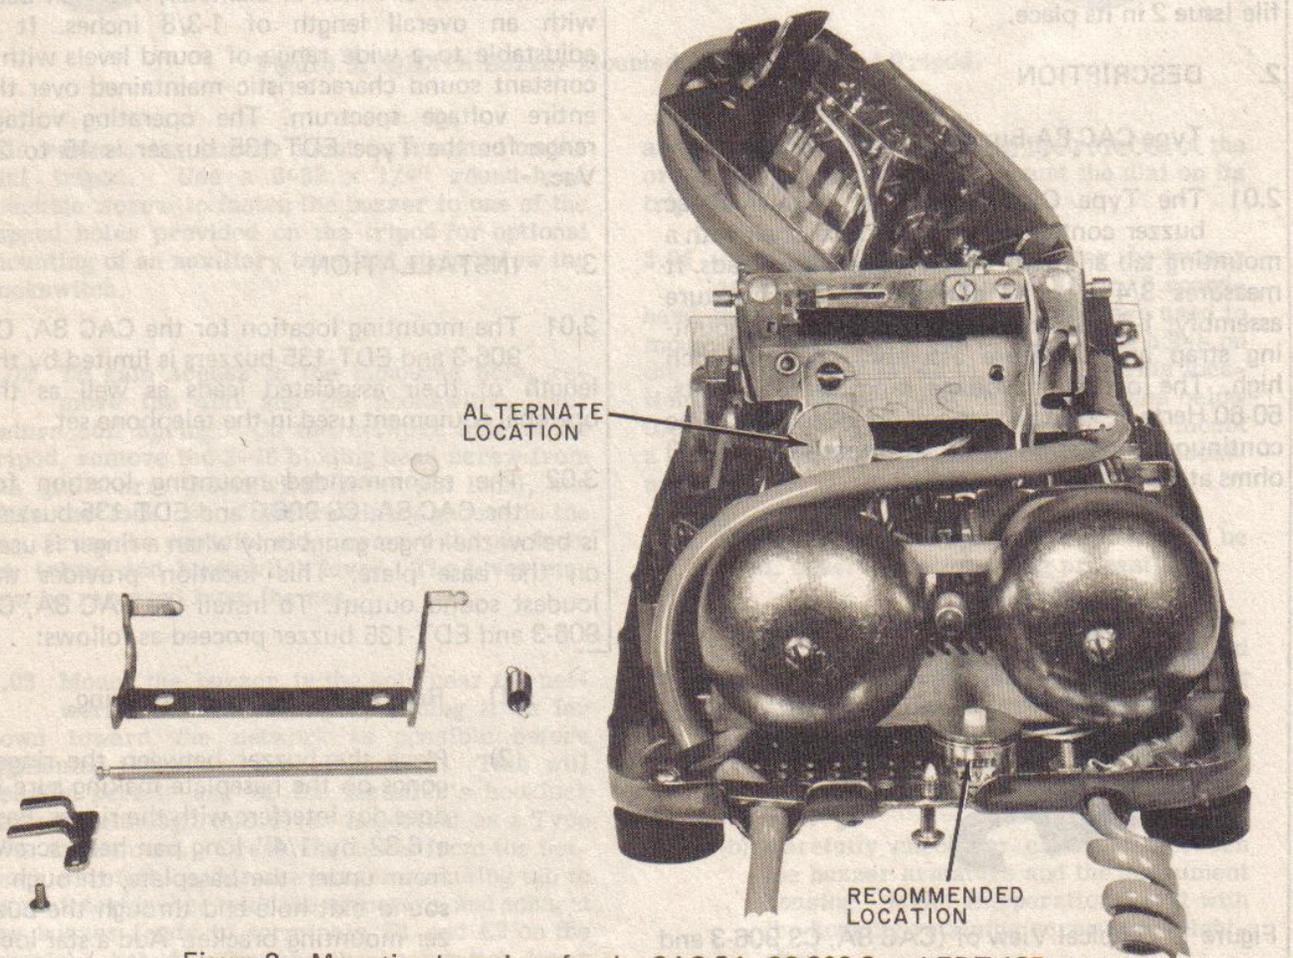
Mounting Locations for the CAC 8A, CS 906-3 and EDT-135 Buzzers.
